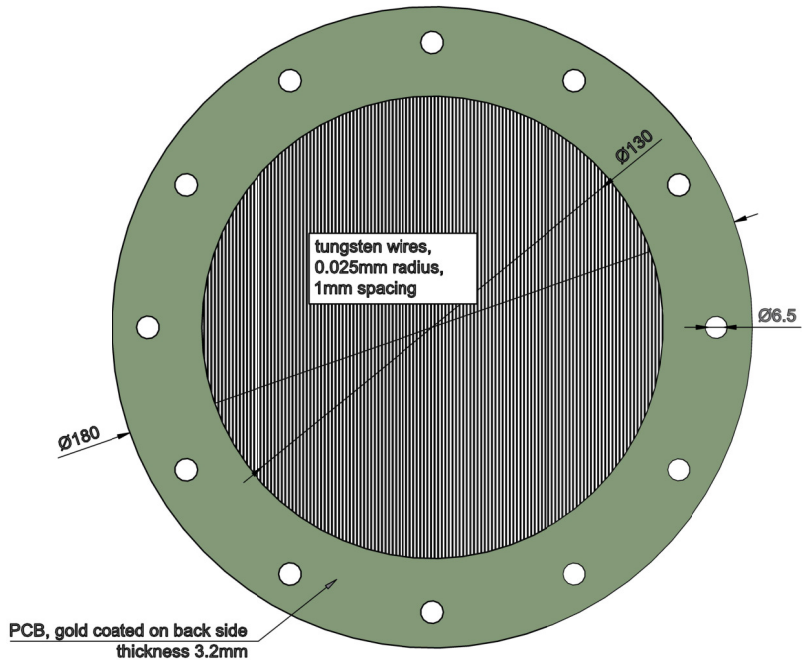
Technical drawing of the Frisch-grid used in the position-sensitive FGIC. The circular opening on the PCB (diameter 130 mm) is covered by tungsten wires with a radius of 0.025 mm and a period of 1.0 mm. The wires are electrically connected via the gold coating on the backing side of the PCB. All units are in mm.
